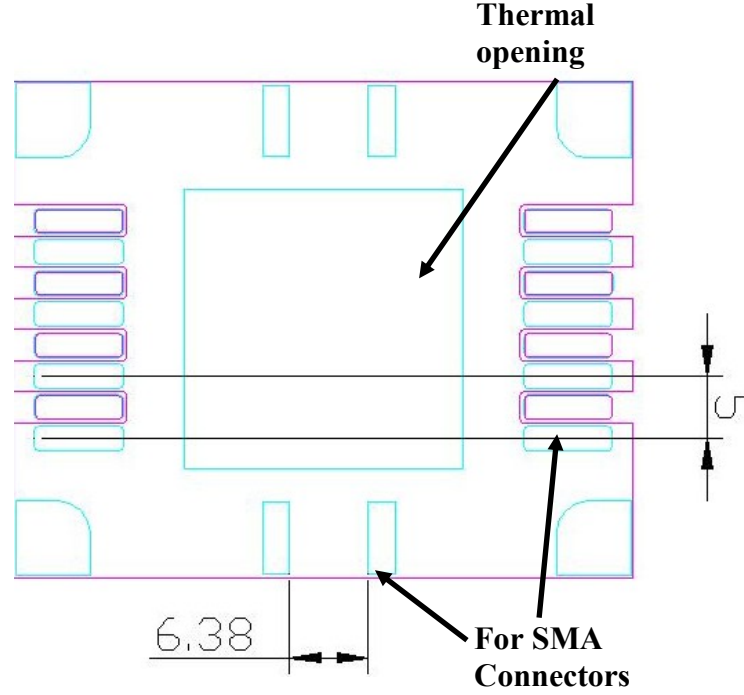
Layout of Testboard\_1 with bottom metal and bottom solder mask layers
